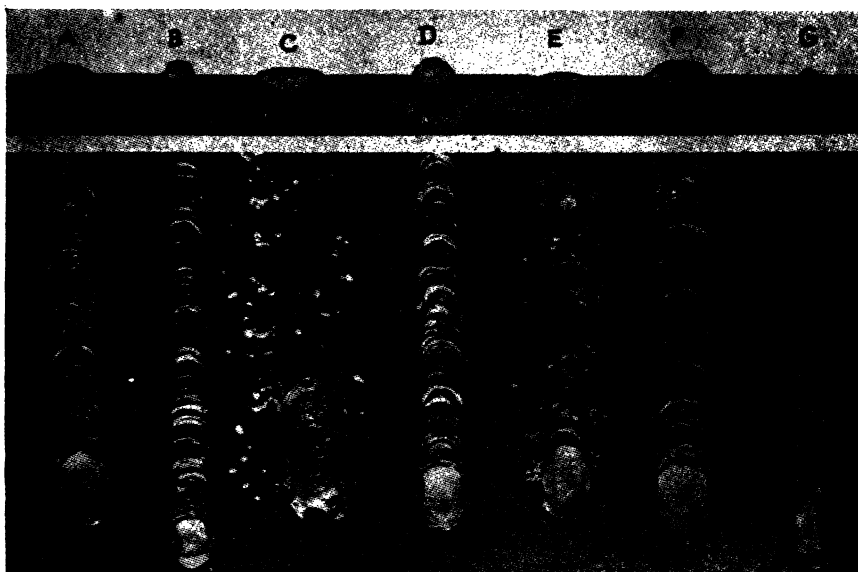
GOOD AND BAD WELDS
